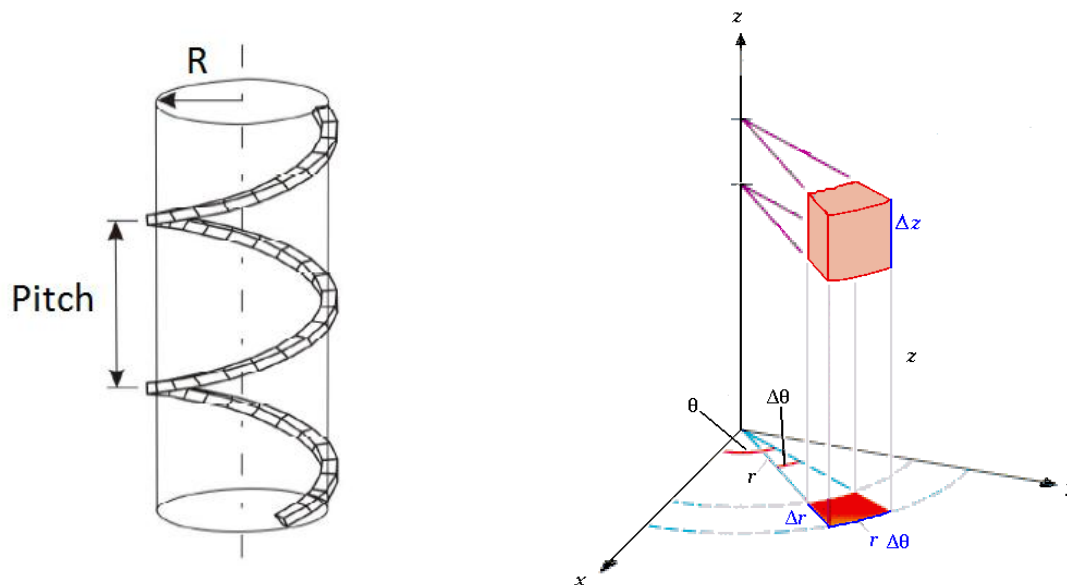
Basic concept for weld spiral path in cylindrical coordinate system
